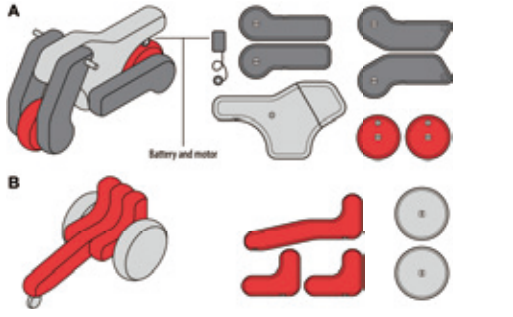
A: Design examples of motorcycle. B: Design example of wheelchair. The isometric drawing shows the assembly of inflatable parts.
